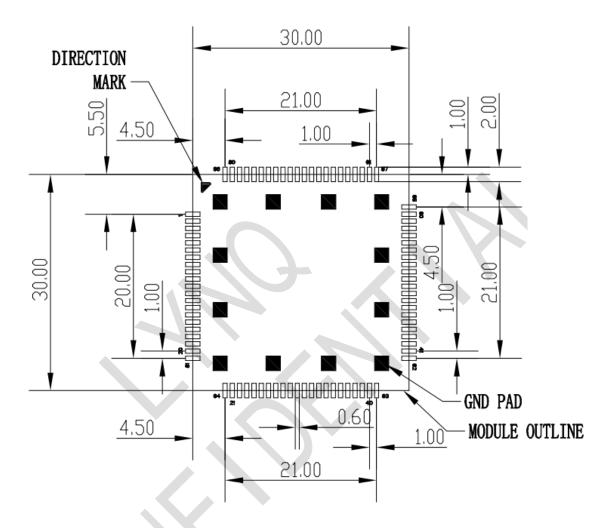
RECOMMENDED LAND PATTERN (Unit: mm) (detail A)
